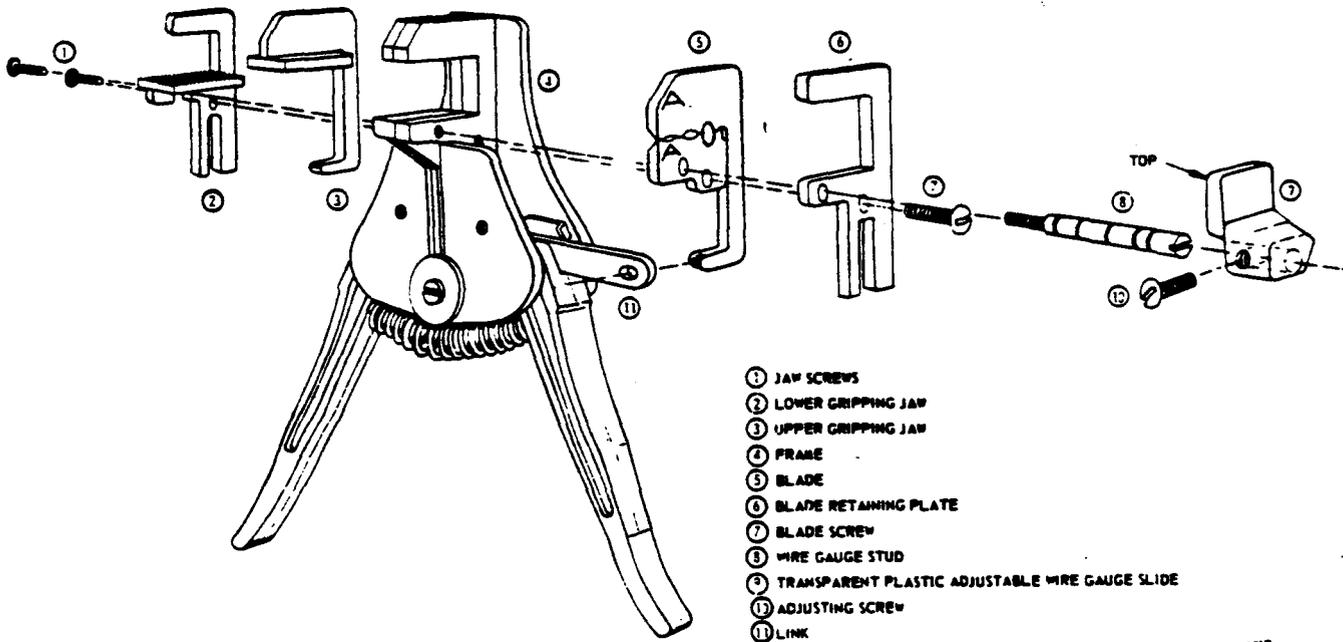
PRINCIPAL PARTS AND ASSEMBLY SEQUENCE FOR R-3457
